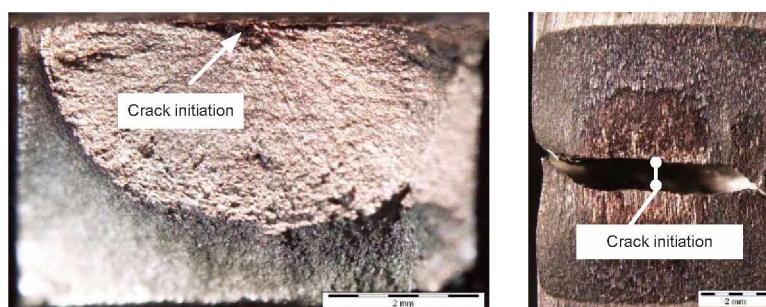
Fracture and fretting damaged surface of a V-shape mill-annealed specimen at 300 MPa
